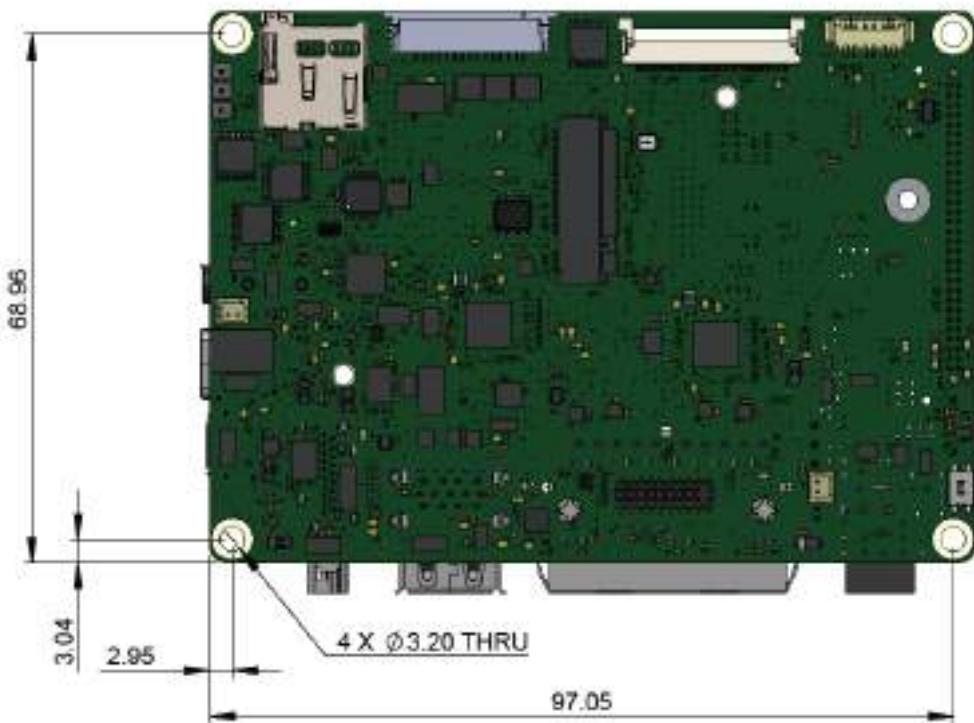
Mechanical Dimensions of i.MX 93 or i.MX 91 Pico ITX SBC Bottom View
